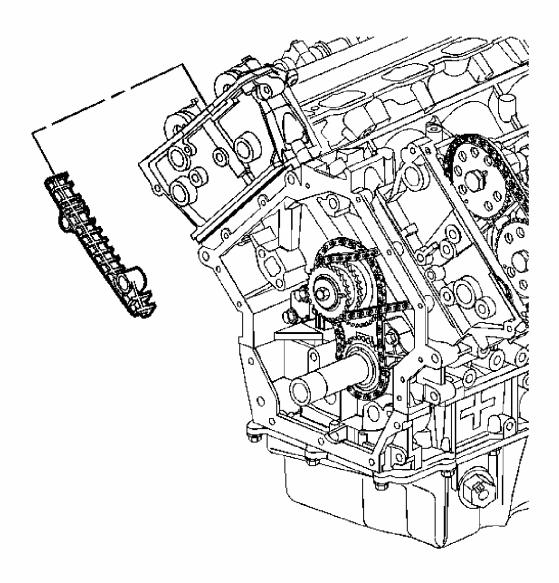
View of Right Secondary Camshaft Drive Chain Guide Courtesy of GENERAL MOTORS CORP.
